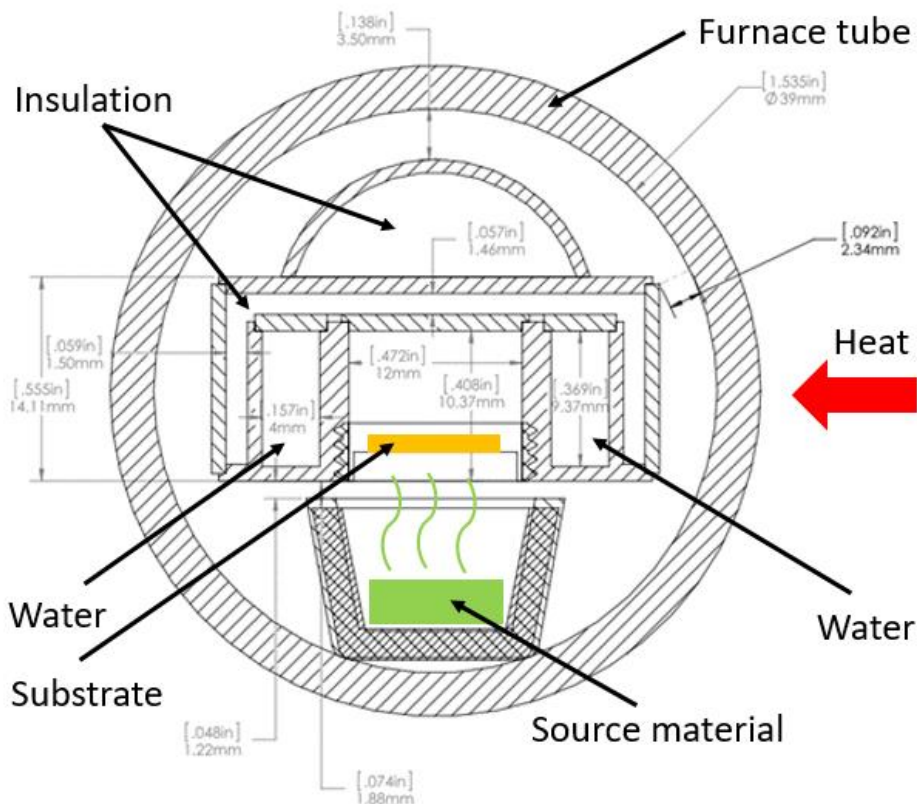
Cross-section view of cooling assembly in tube furnace. Cross-section view of cooling assembly installed in tube furnace with source material crucible. Heat vaporizes source material, while cooling assembly maintains substrate at cooler temperature.
